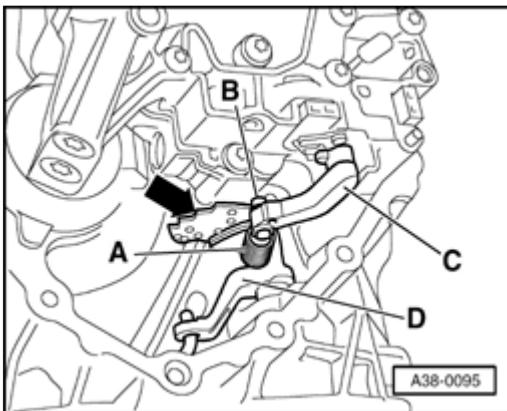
Identifying Catch Of Selector Shaft, Spring & Roller
